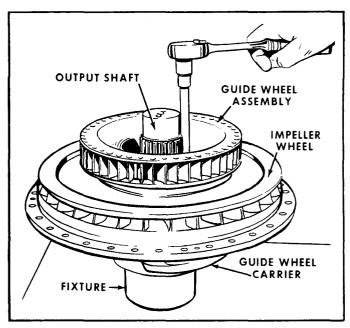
Removing the Guide Wheel Assembly from the Guide Wheel Carrier.
